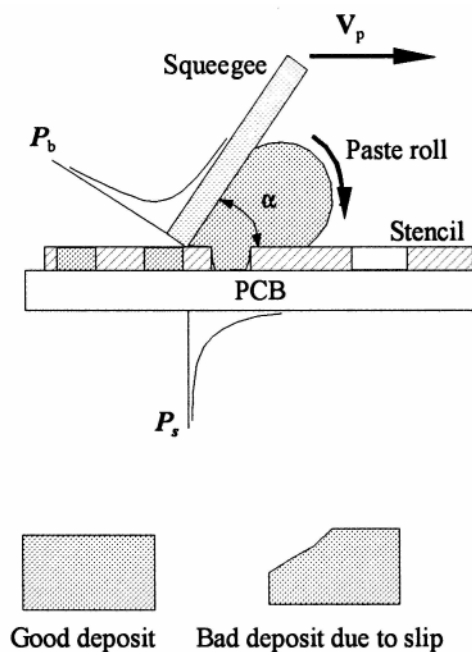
Stencil printing of paste using squeegee blade and imperfect deposit profile due to paste slip in printing.
